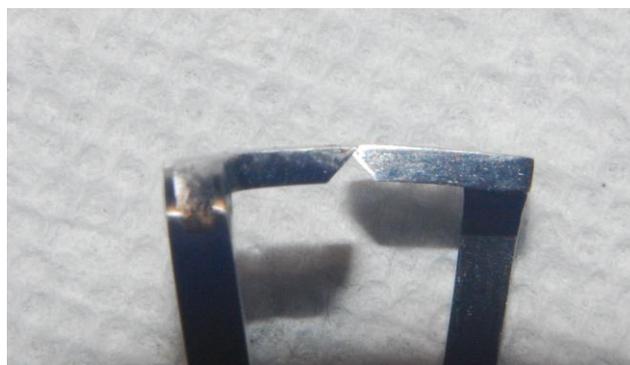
Initial pallet alignment. Adjust as determined by test running the escapement.
